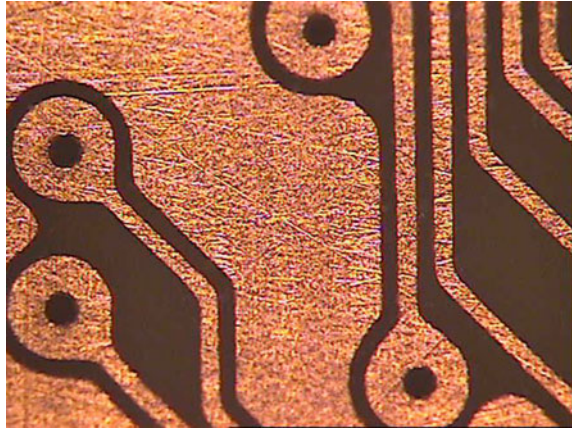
PCM board with 38- μm line and 76- μm holes [3]
